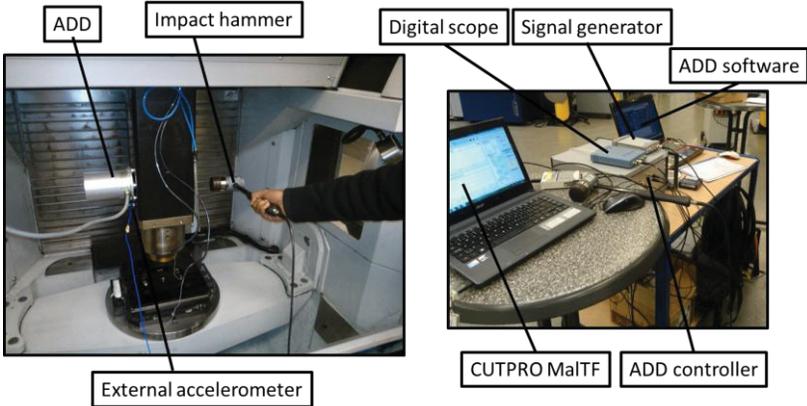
Measurement setup to test the machine tool dynamics with the ADD
